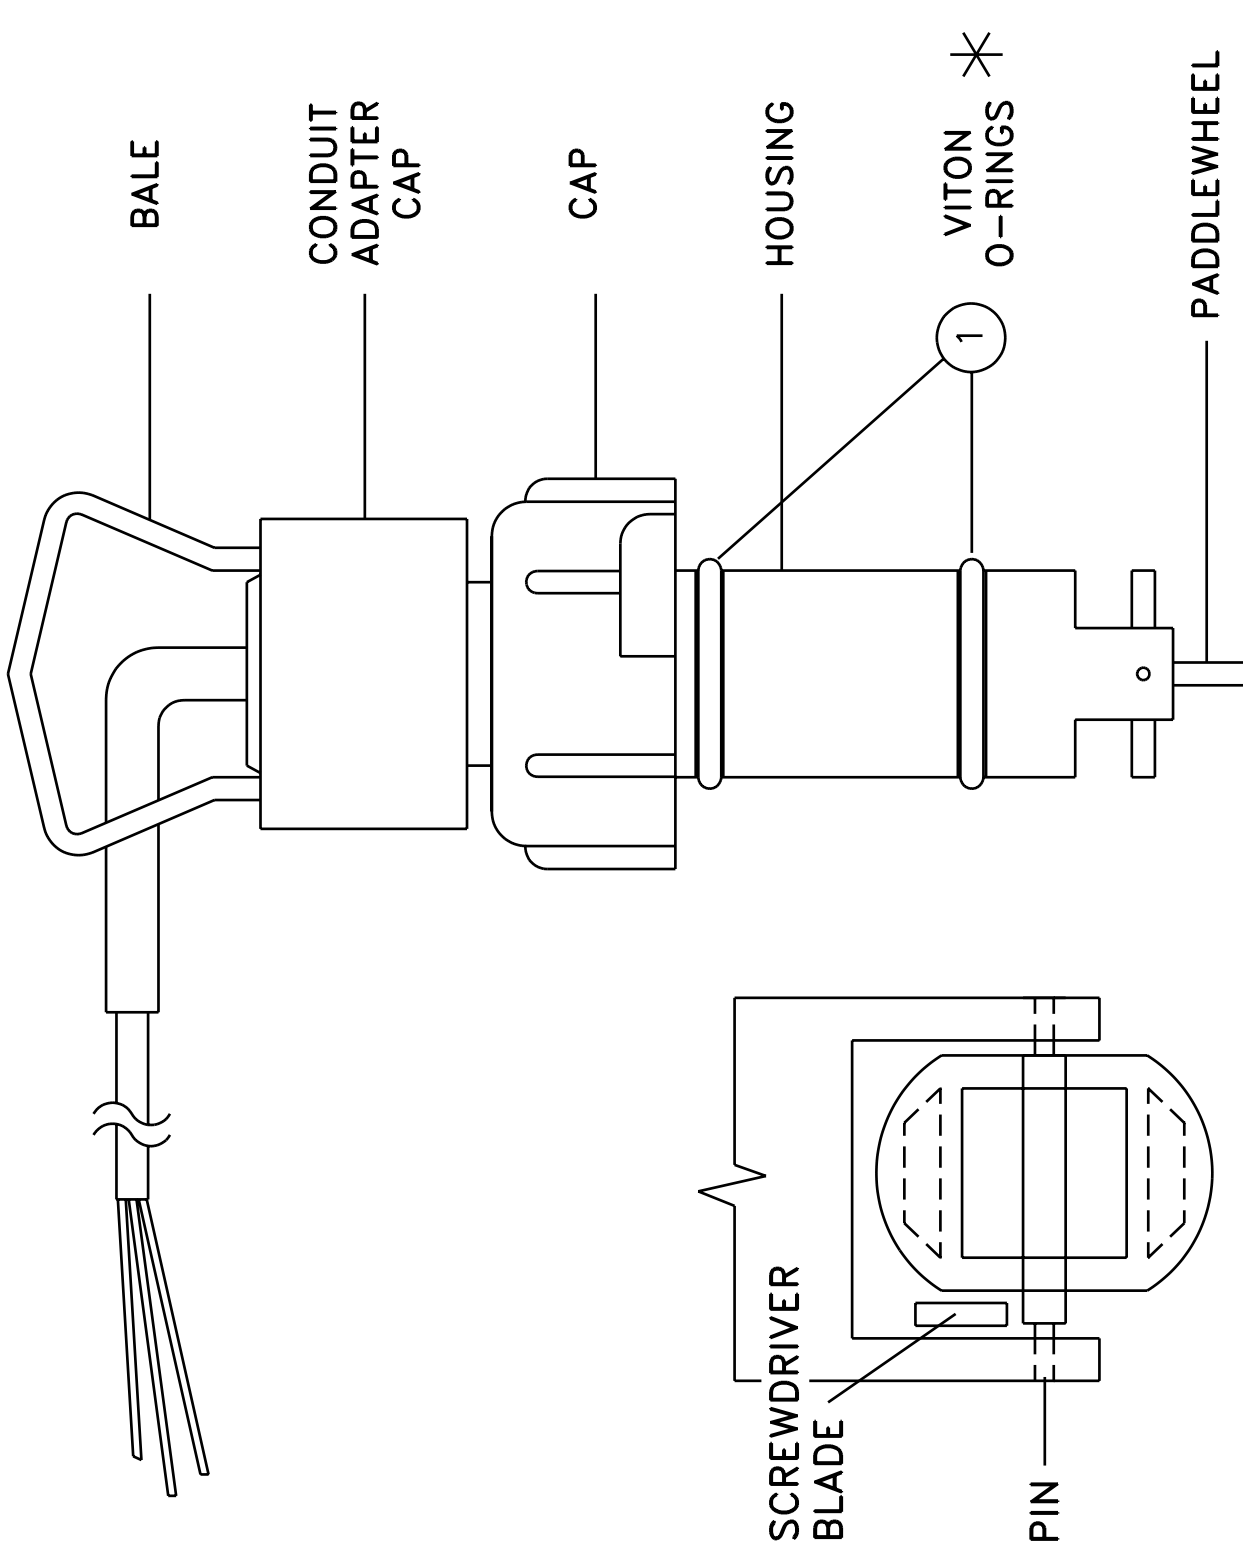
REMOVAL OF PADDLEWHEEL PIN
